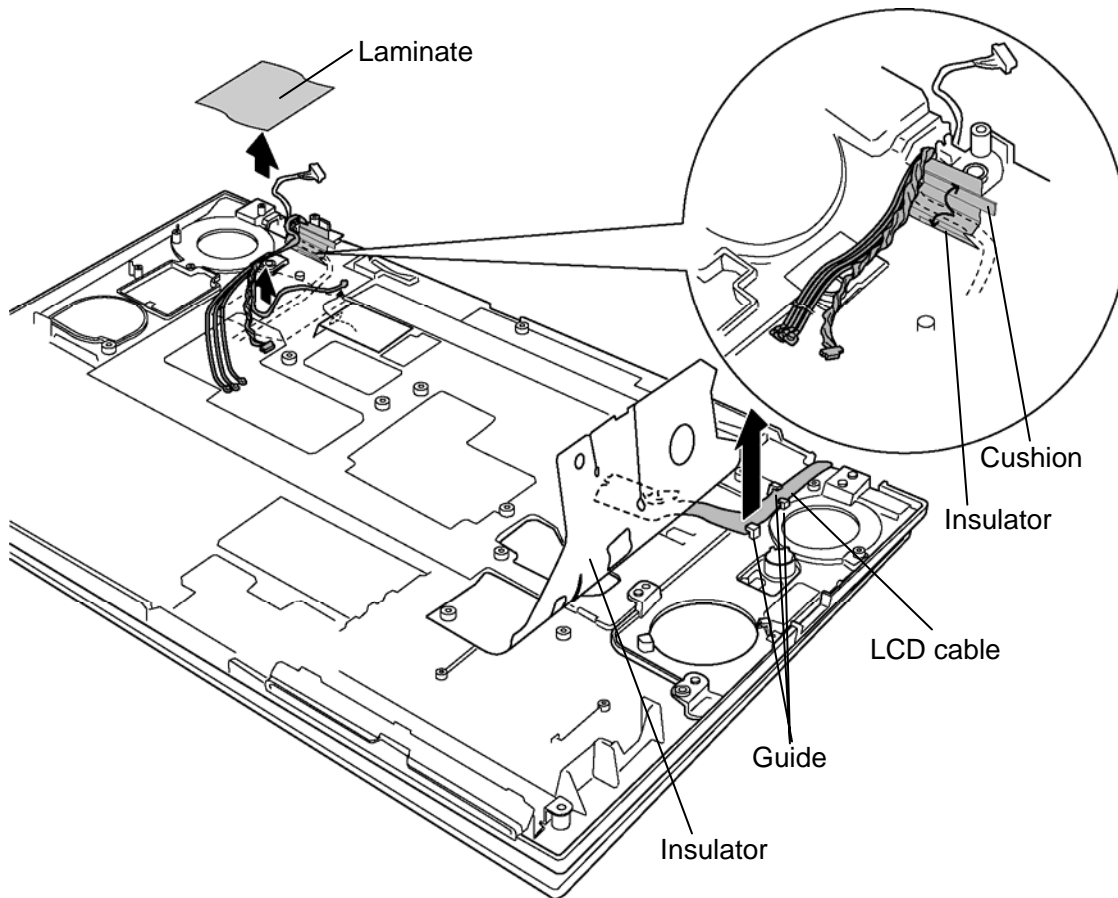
Removing the LCD assembly/Hinge assembly (1)
